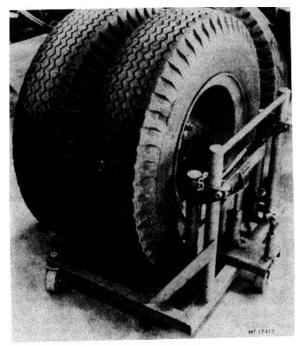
Using a Wheel Dolly to Remove Wheel, Hub and Drum Assembly
